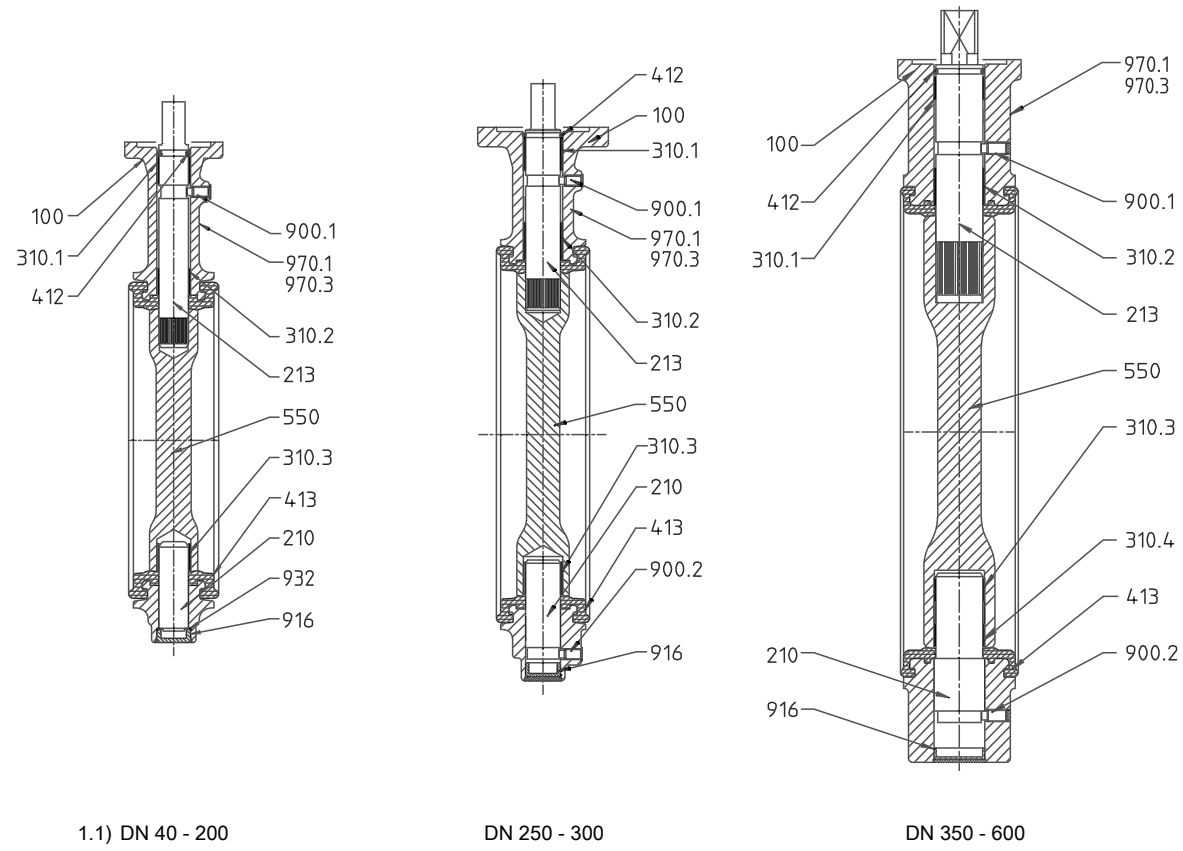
Sectional drawings of ISORIA 10/16 for DN 40 - 600
